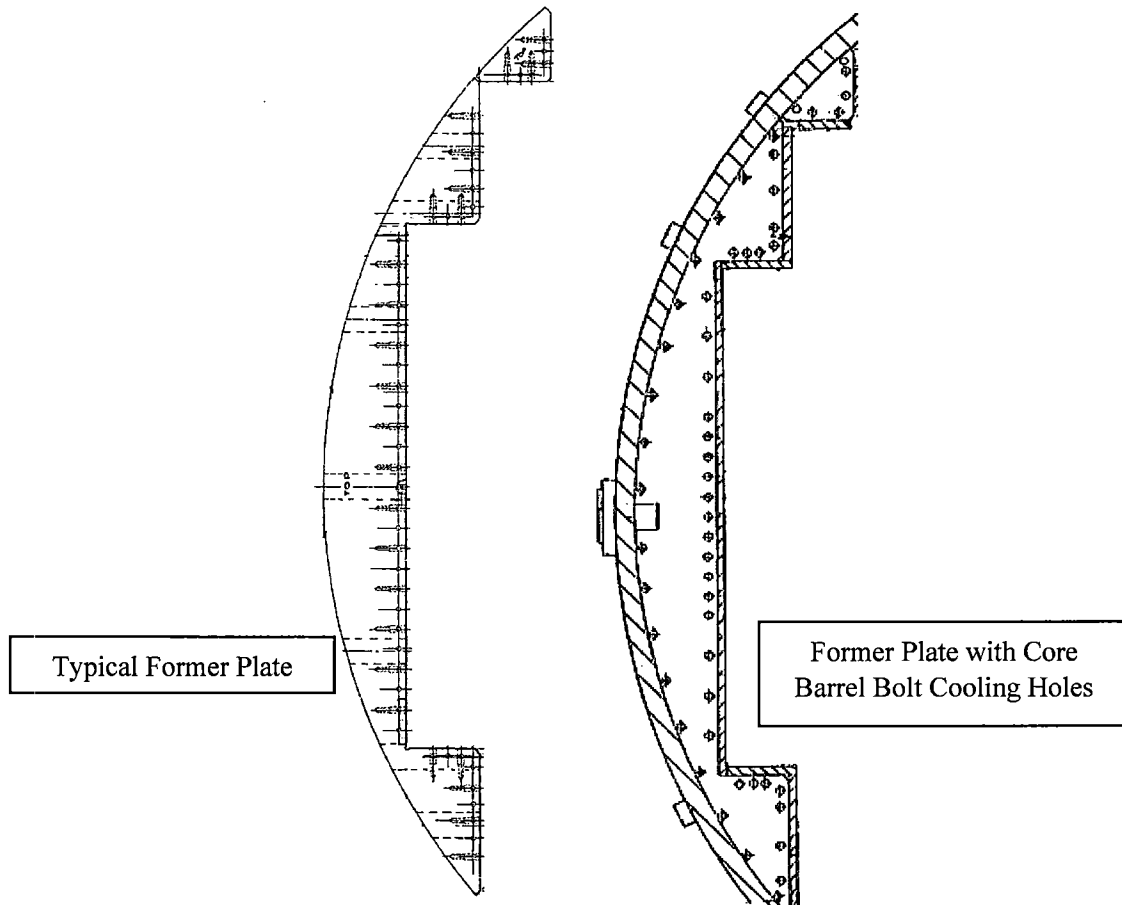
Westinghouse 4 Loop Standard Upflow Plant Former Plates
